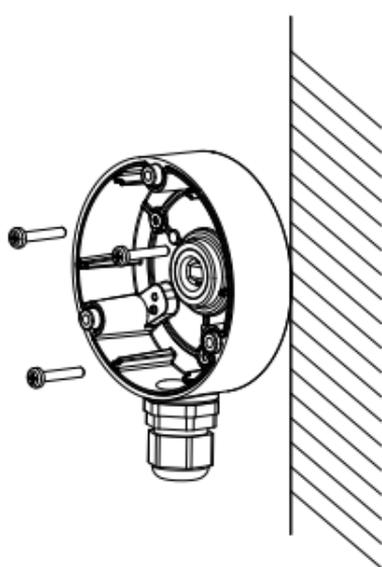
Secure the Junction Box's Body to the Wall/Ceiling
